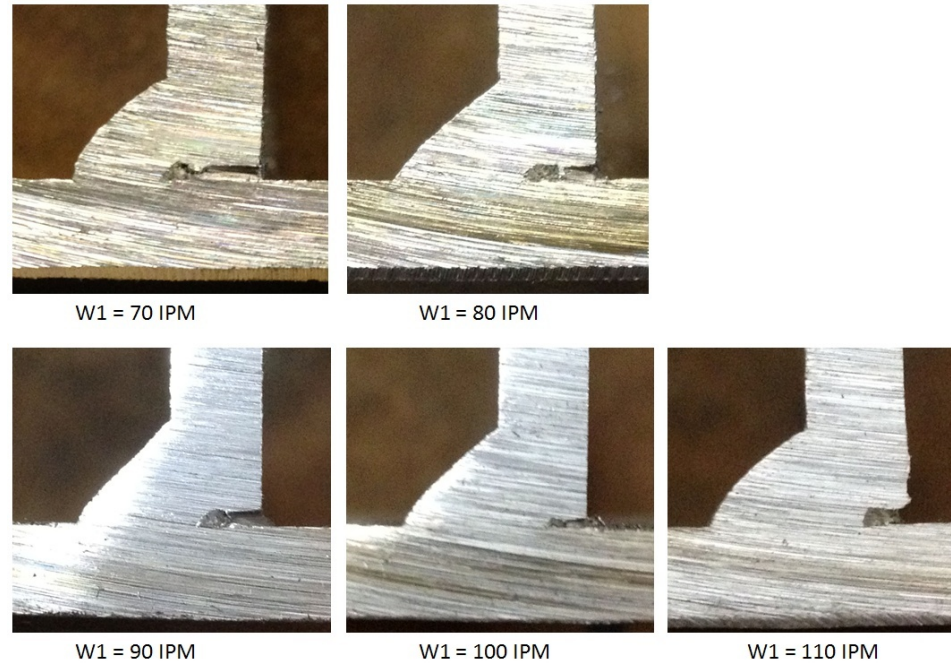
Cross-sections of Weld Beads in Heat Input Experiments
